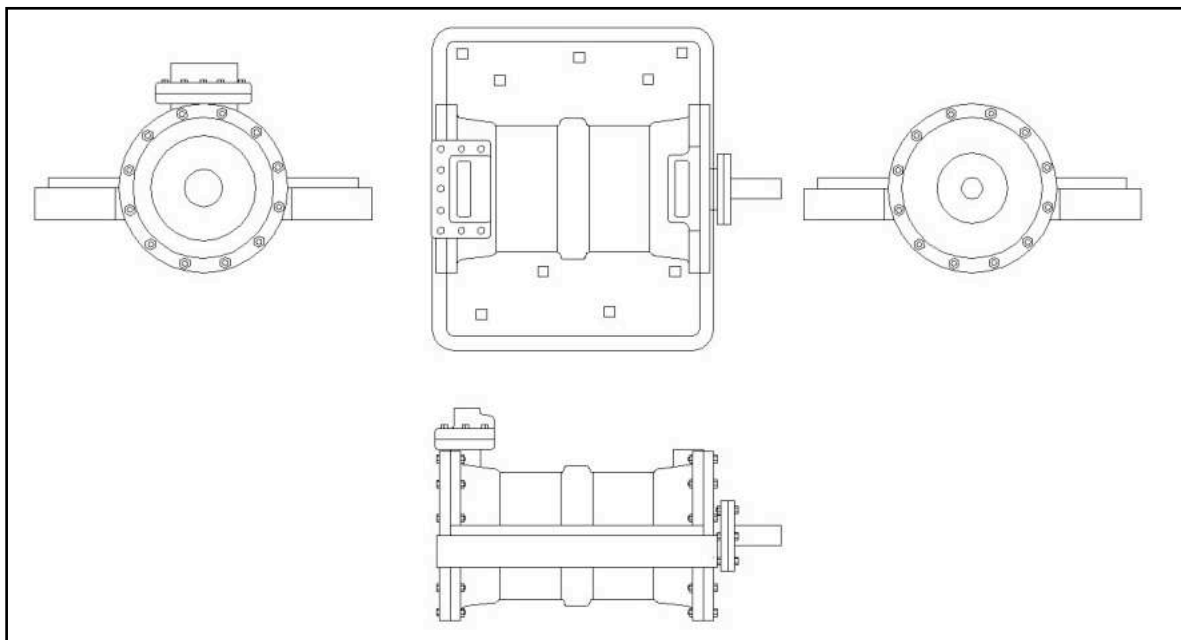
Top, side, and end view schematics of the CSS *Georgia* steam cylinder.
